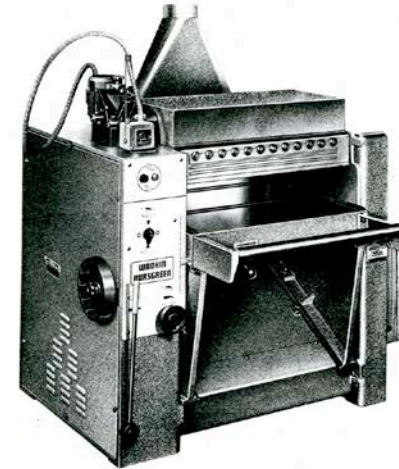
9 500 mm Panel Planer with Shaving Collector Hood and Sharpening Attachment.
